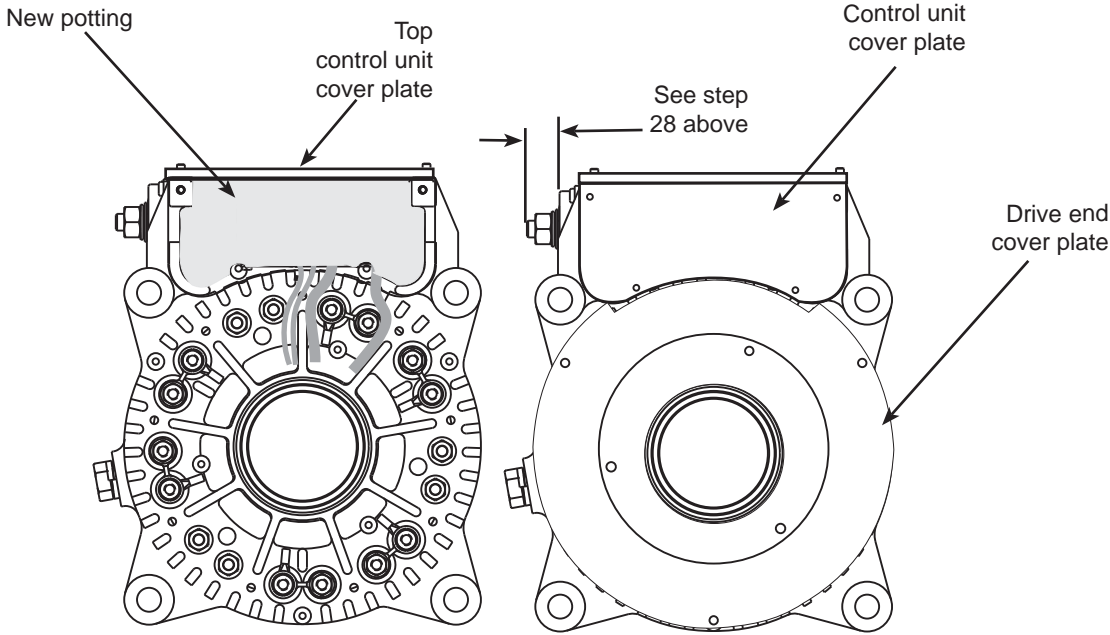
Replacing Control Unit Assembly and/or B+ Terminal on N1388 Alternator
